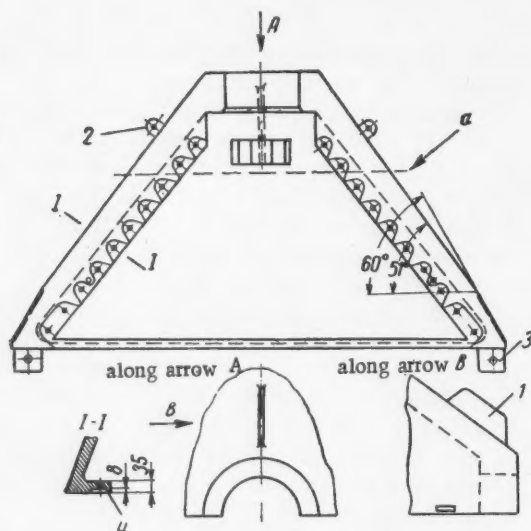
Small bell: a) line of cut; 1), 2), 3) assembly "lugs"; 4) groove for cutting bolts.
